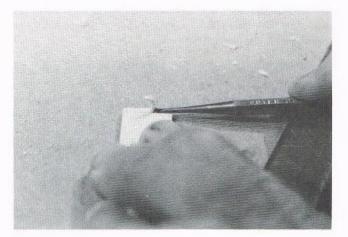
Lay the board on a flat surface near the edge of the table (to allow for hand movement). When cutting any joint, always secure the workpiece on a firm surface or in a clamp. Hand-holding the workpiece and the tool may be OK if you are an orchestral conductor waving a baton, but it produces uneven results in cabinetry and keeps open the exciting possibility that the cut may be made in your finger rather than the wood.
